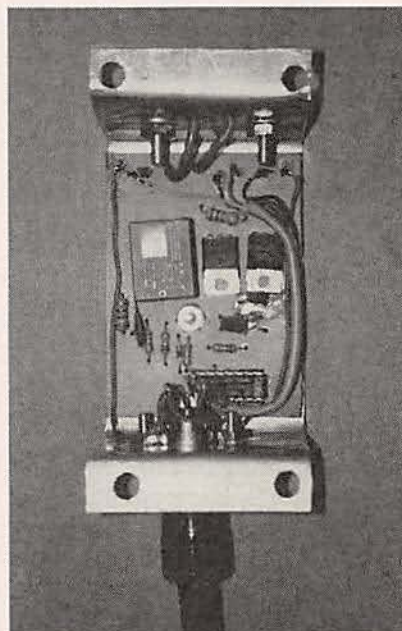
THE POWER-CONTROLLER board is mounted on a 0.064-inch aluminum plate bent into a U-shaped frame. The DIN socket and the terminal strip are mounted on the sides of the U-bracket.
